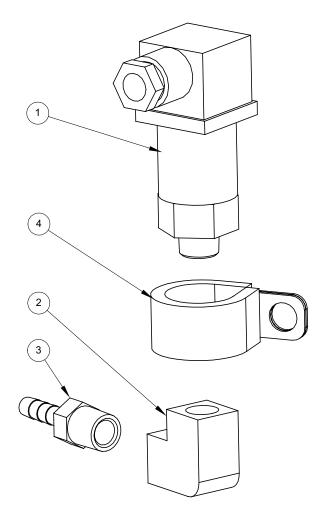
Air Compressor Assembly C-5525 Rev C
